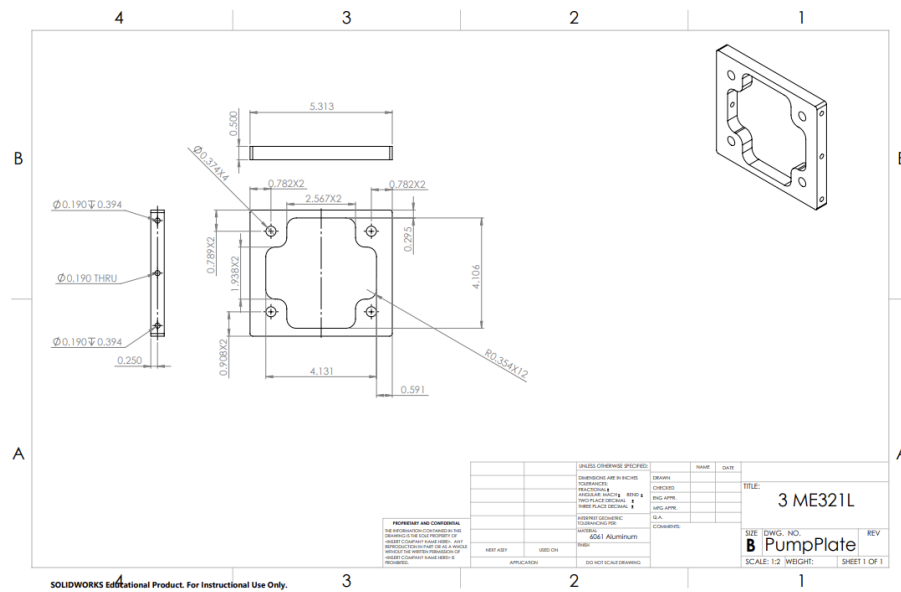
CAD fabrication drawing of the pump plate. All dimensions in mm.
